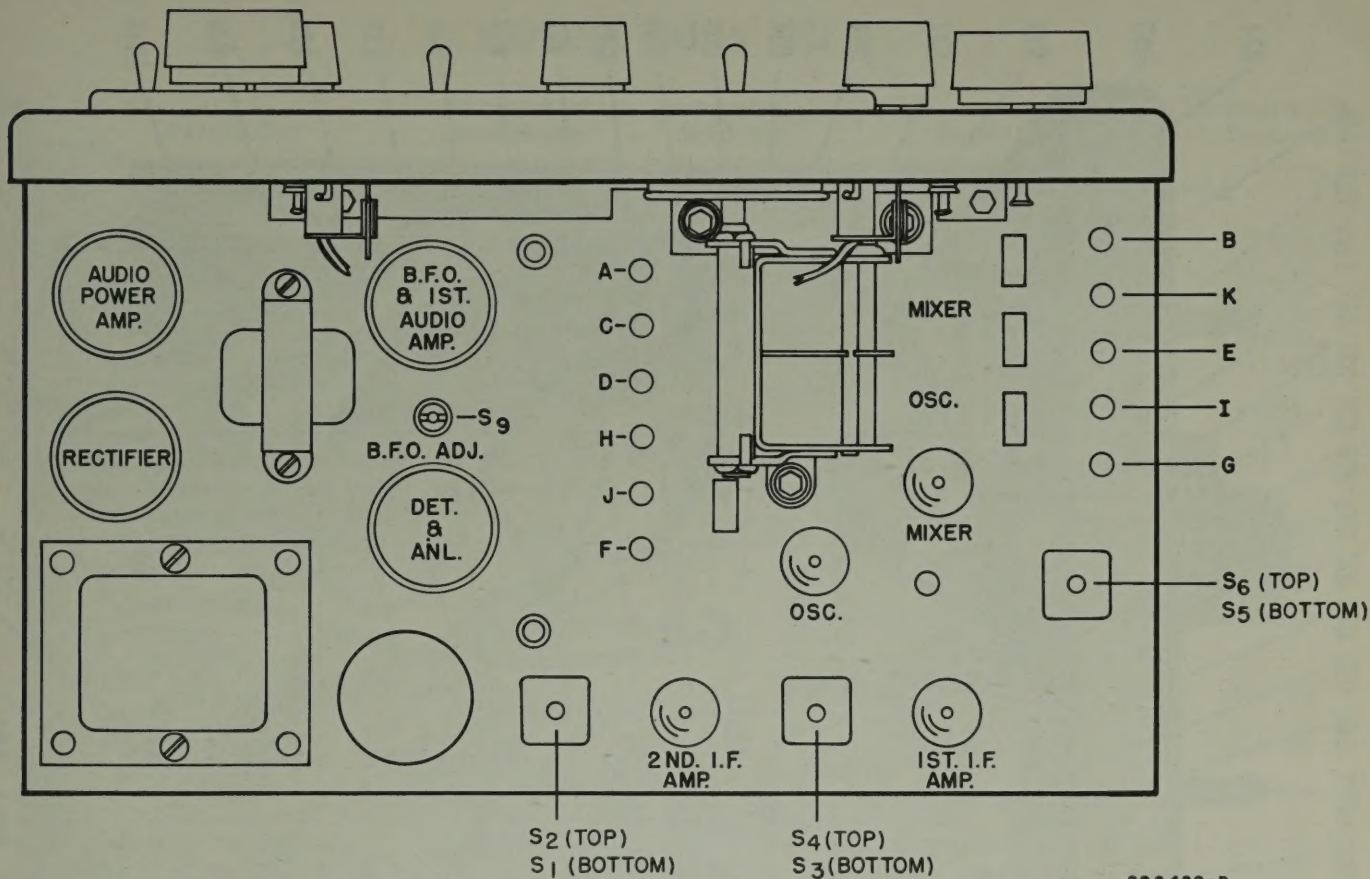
Top View of Chassis Showing Location of Alignment Adjustments
